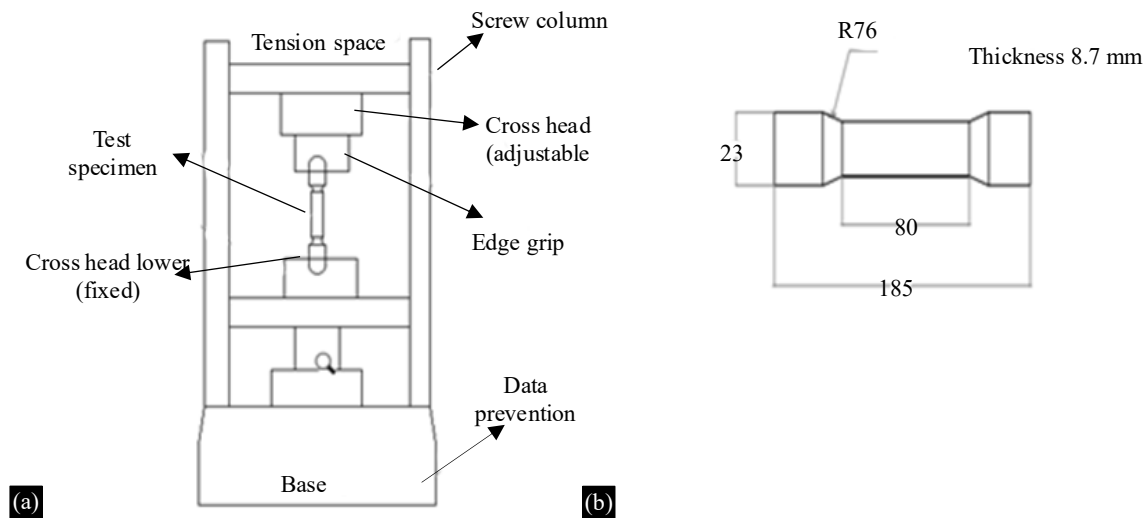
(a) Representation tensile Test machine (b) Specimen for tensile test.
